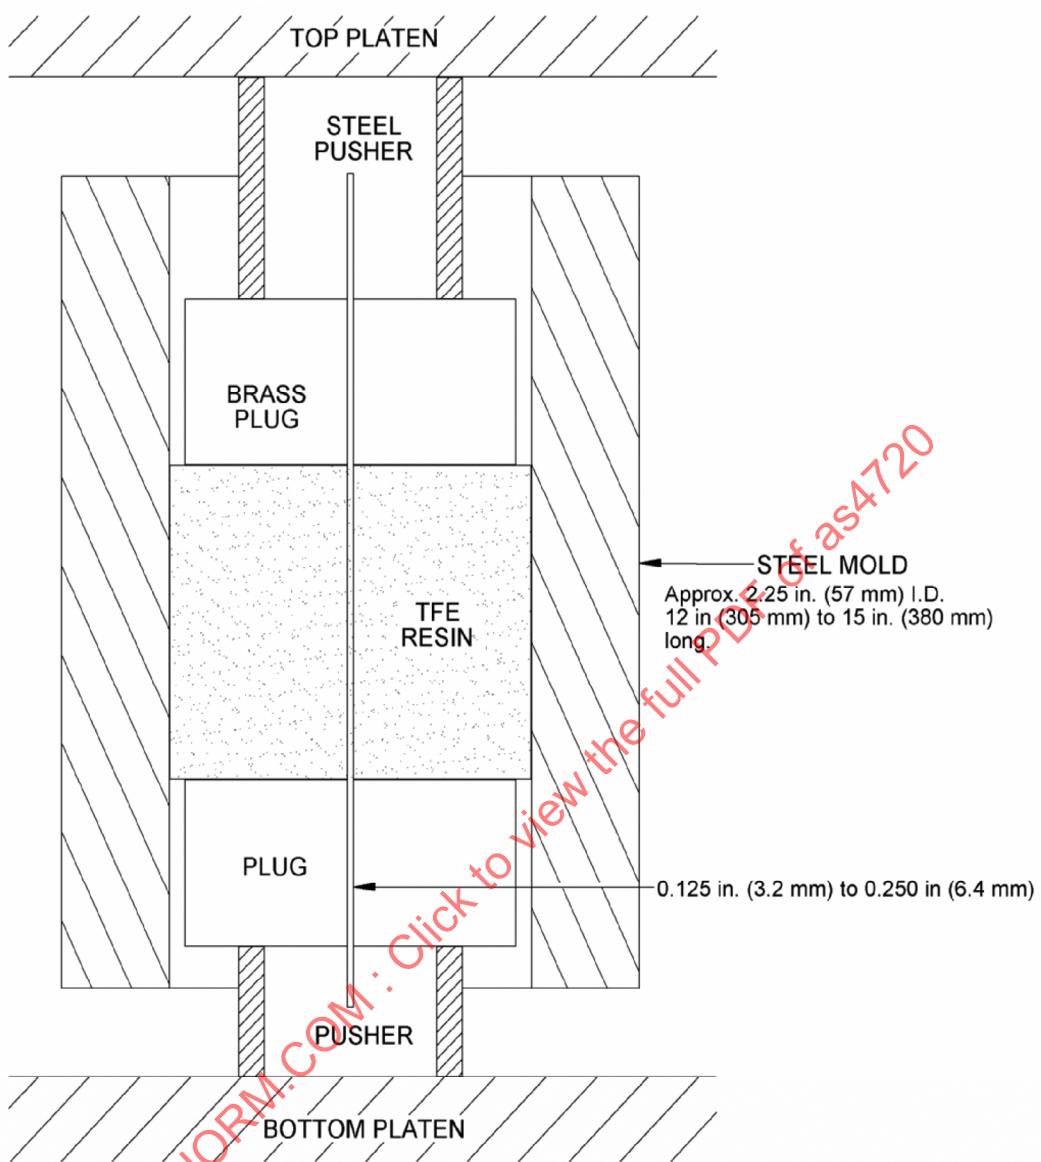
PREFORMING OF PTFE TEST BILLET WITH CENTER HOLE
